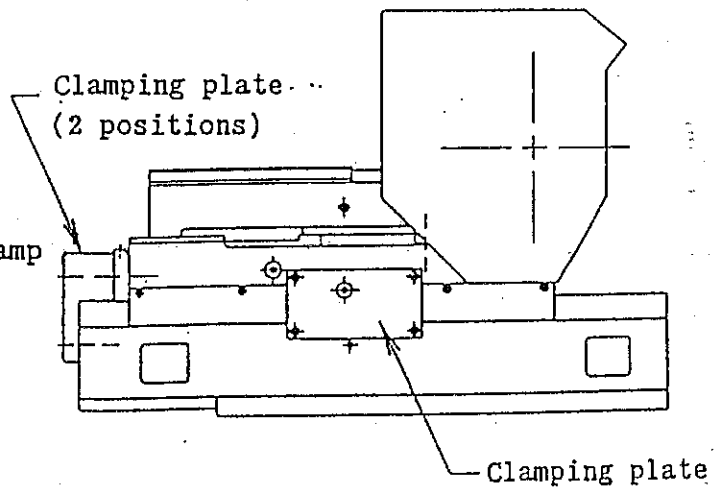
Clamps for the Wheel Spindle Base & Saddle
